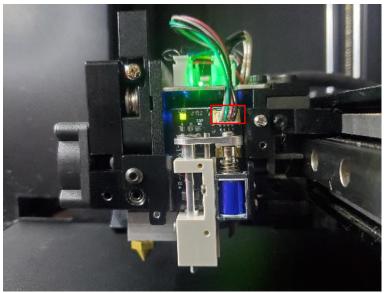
Auto-leveling assembly connector on the auto-leveling assembly.
